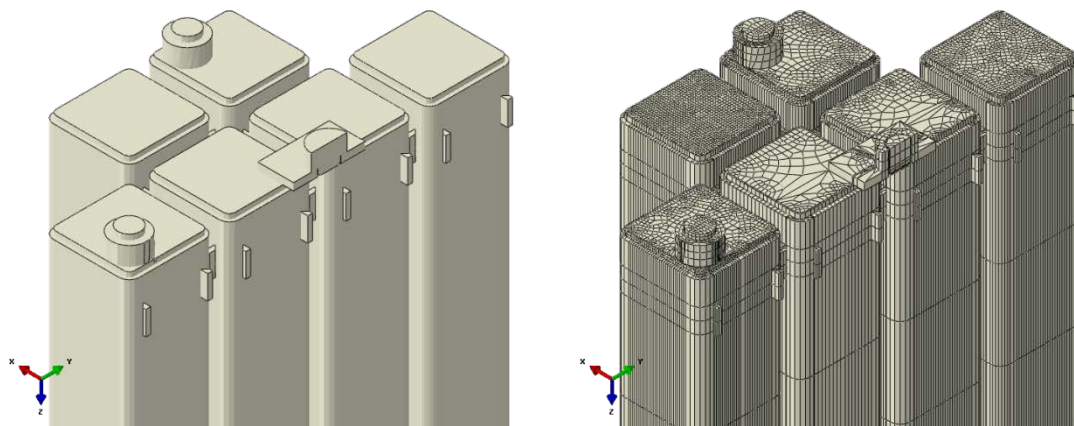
Steel channel tubes geometry (left), and mesh (right) – base view.
